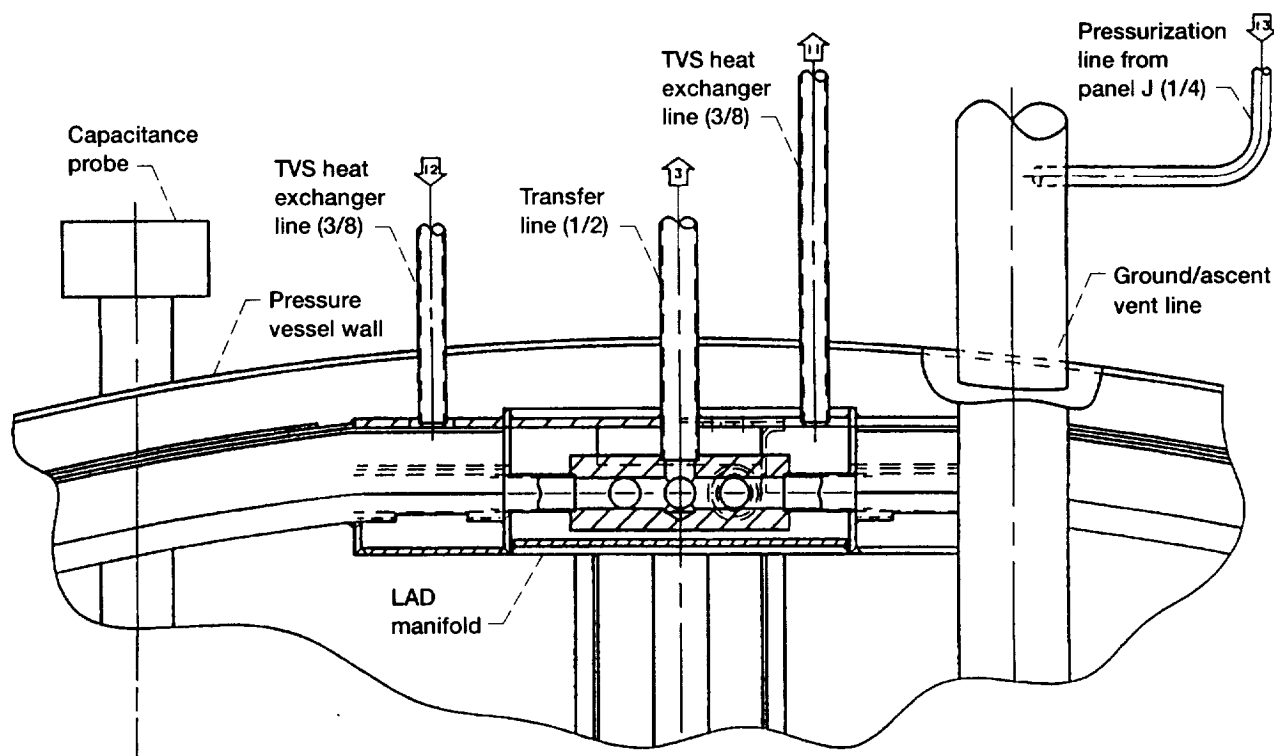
Supply tank forward dome—LAD manifold plumbing penetration. Tube dimensions are in inches.
